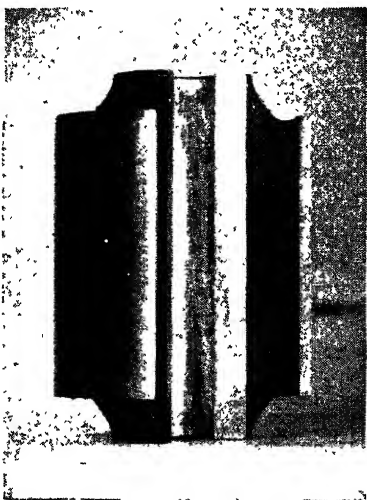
Sectioned tubular rubber engine-mount bushing. (*Lord Manufacturing Co.*)
